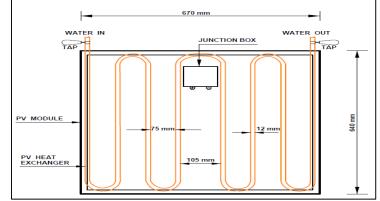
Module and heat exchanger assembly with important dimensions and necessary features
